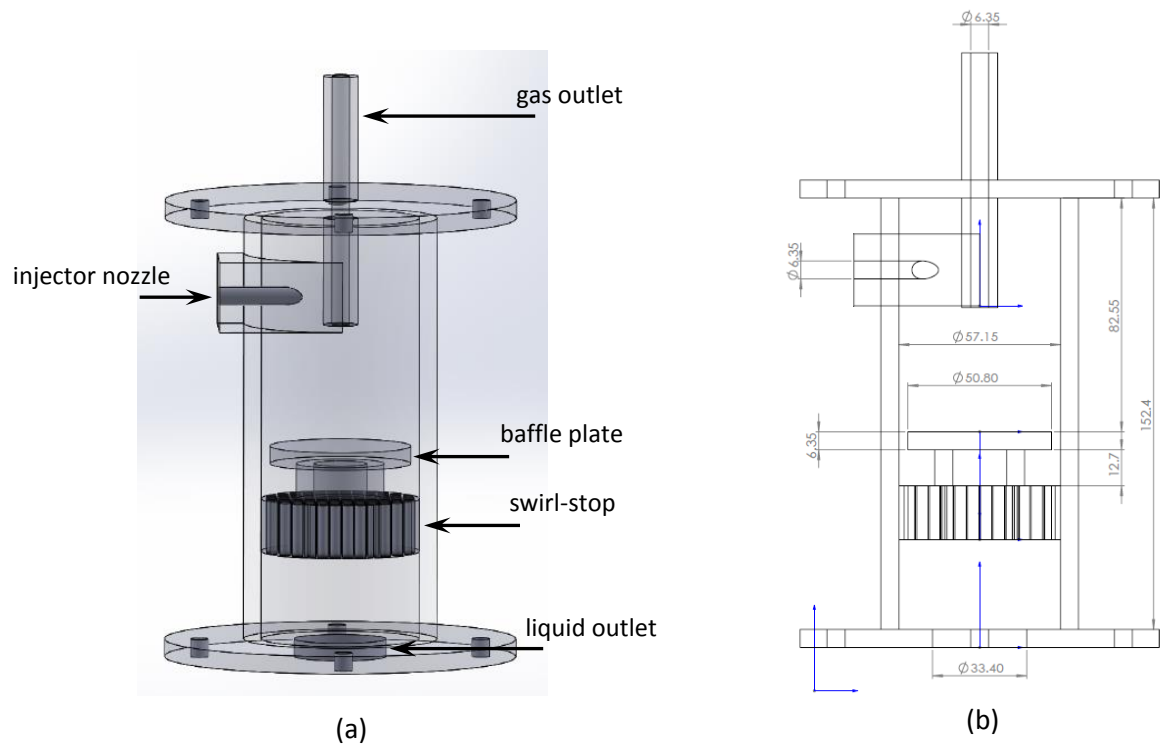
Cyclone separator geometry used in this study: (a) schematic and (b) pertinent dimensions (in mm)
